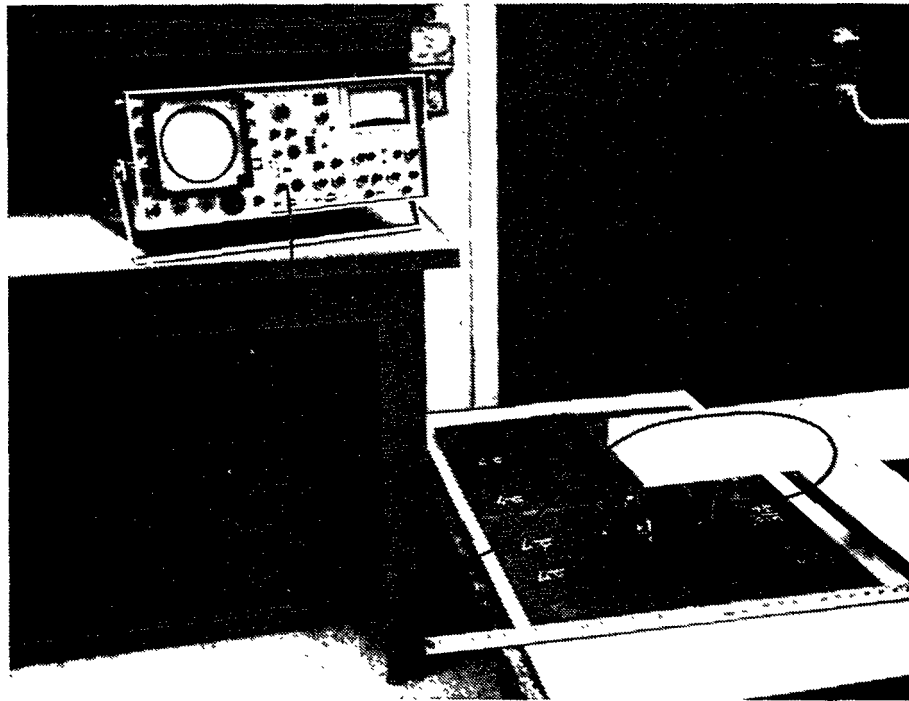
Liquid-Filled Wheel Shear-Wave Inspection
